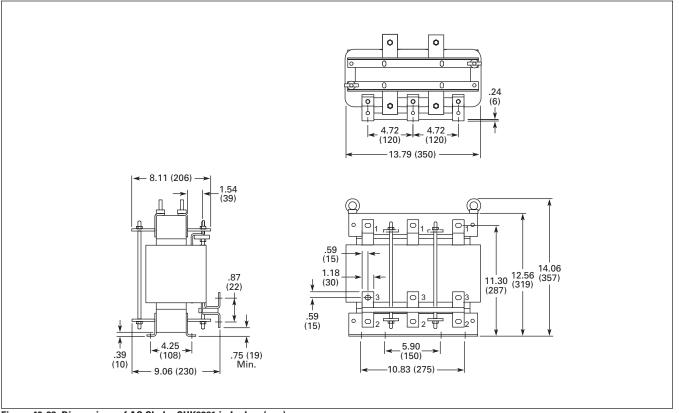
Dimensions of AC Choke CHK0261 in Inches (mm)
